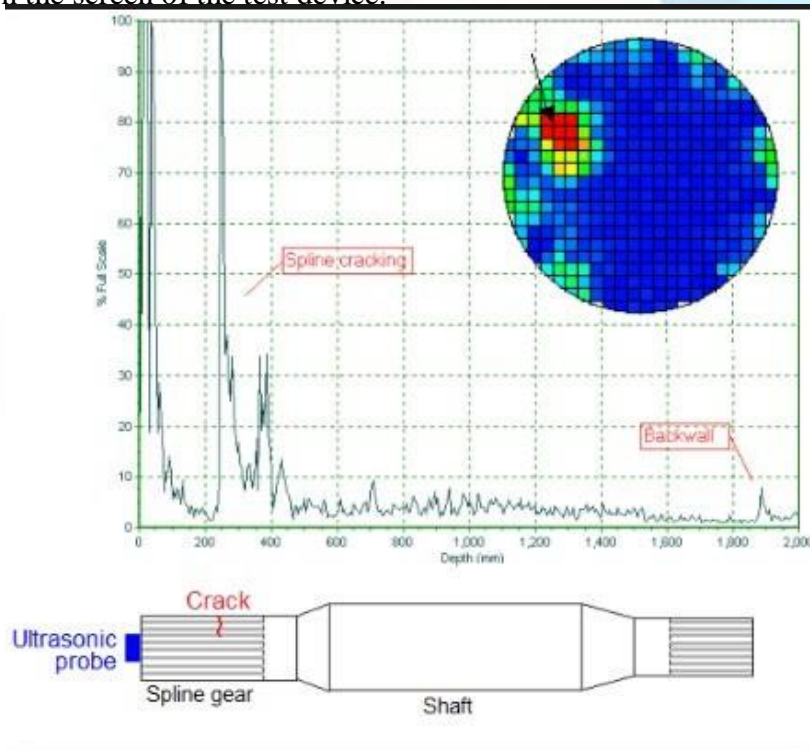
Milled shaft with cracks detected by ultrasonic inspection method
